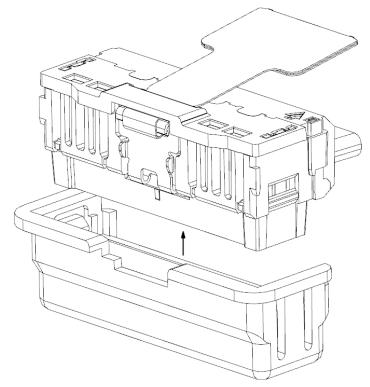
Free-Side Connector & Dust Cover Assembly Direction
